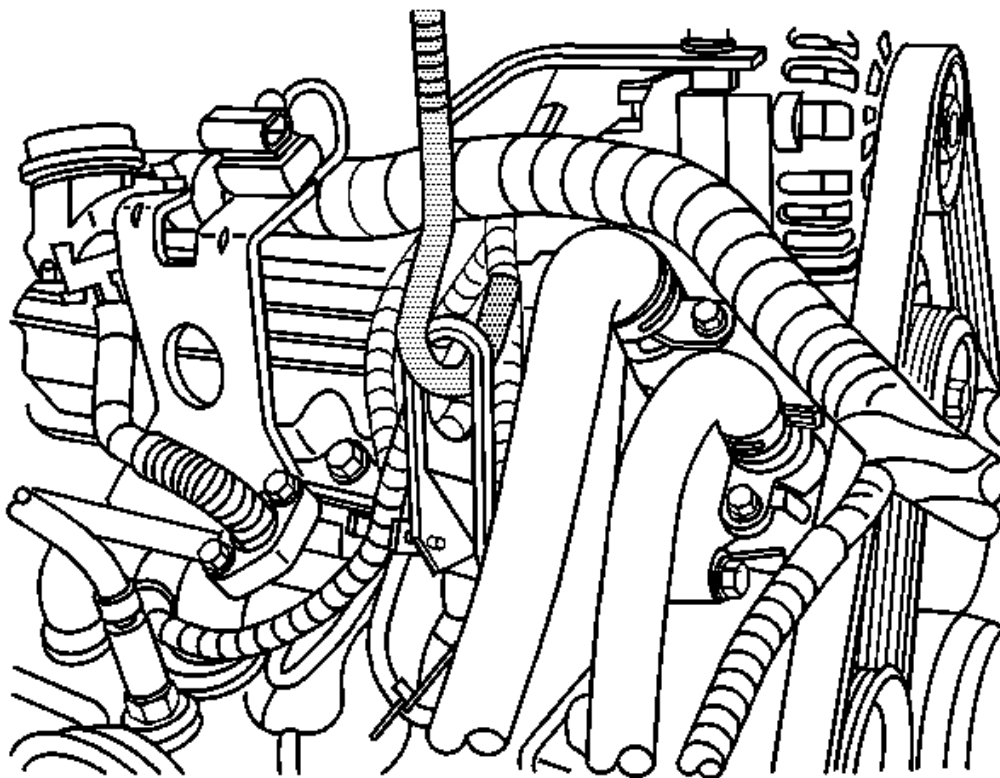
View of Lift Hook J 28467-7A Through Front Engine Lift Hook Bracket
